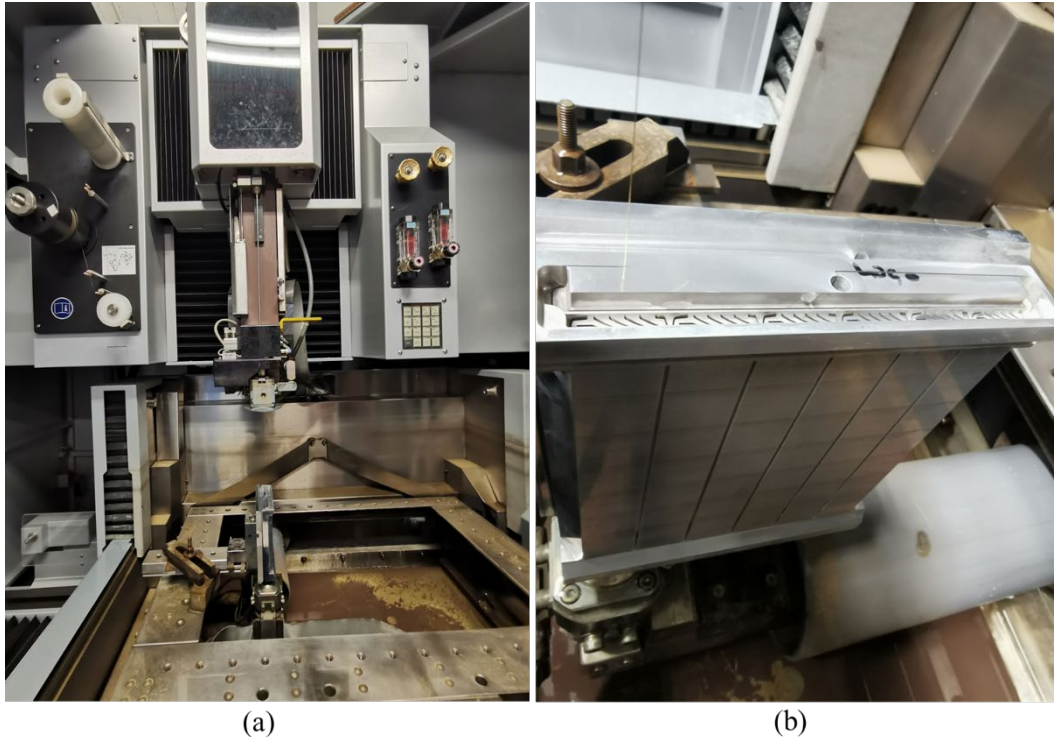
2 (a) Wire-cut EDM machine; (b) The target is being wire-cut under EDM machine at ZEA-1.
